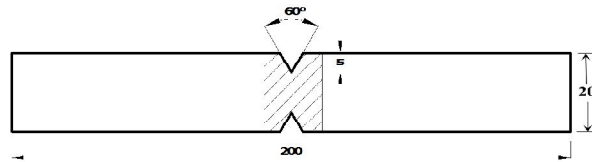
Dimensions of notched tensile test specimen (in 'mm')
